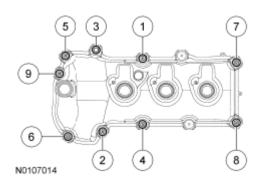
Identifying RH Valve Cover Stud Bolts Tightening Sequence (Late Build Vehicles) Courtesy of FORD MOTOR CO.
